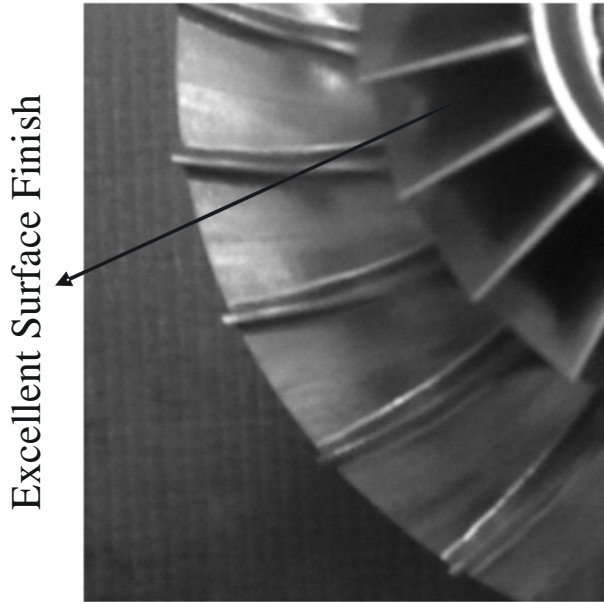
MACHINED COMPONENT BY USING 5-AXES SIMULTANEOUS MACHINING APPROACH THROUGH CAM SOFTWARE
